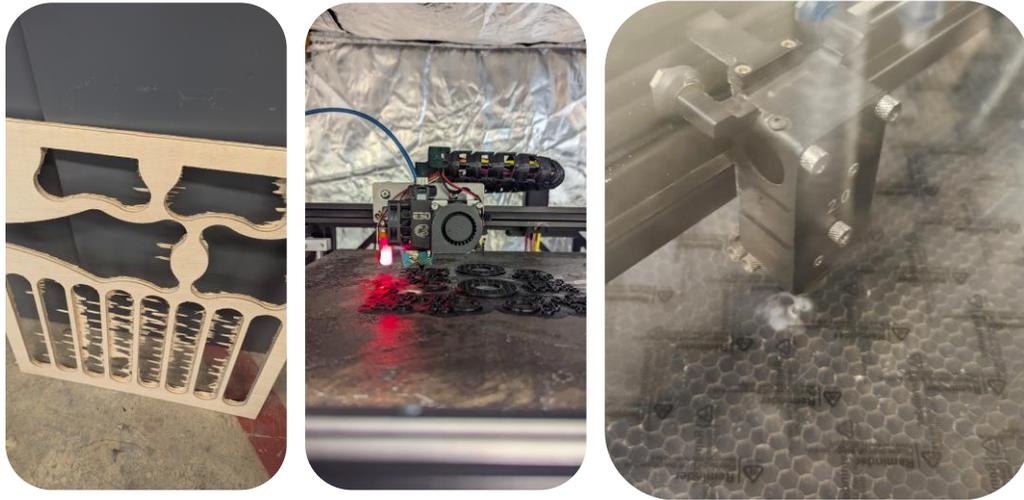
Manufacturing processes from left to right: CNC milling, 3D printing, and laser cutting.
